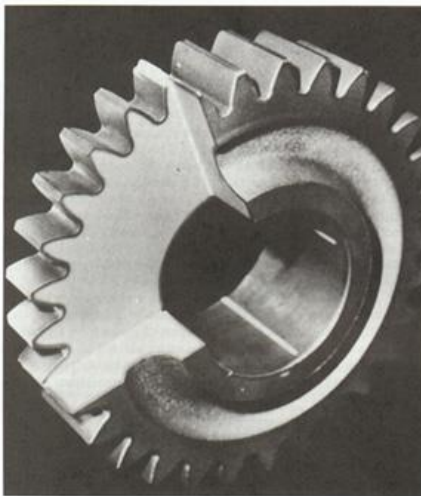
Cross Section of a Carburized Steel Gear. [23].
